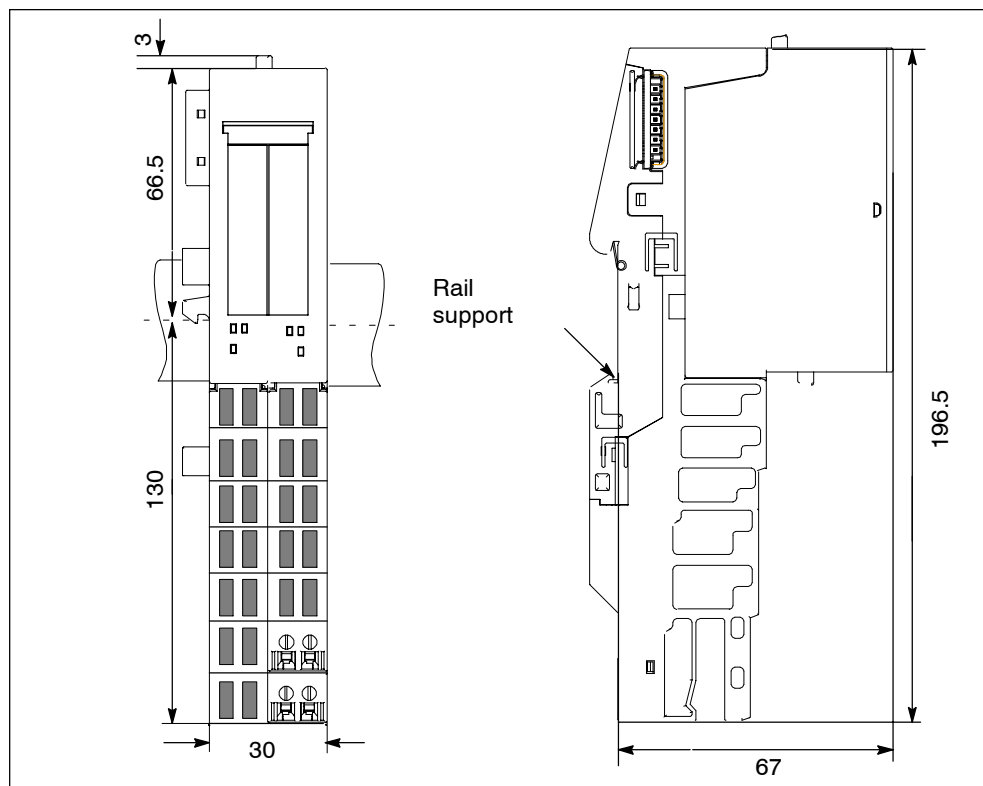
Dimensioned drawing of a terminal module (screw-type terminal) with an electronic module inserted
